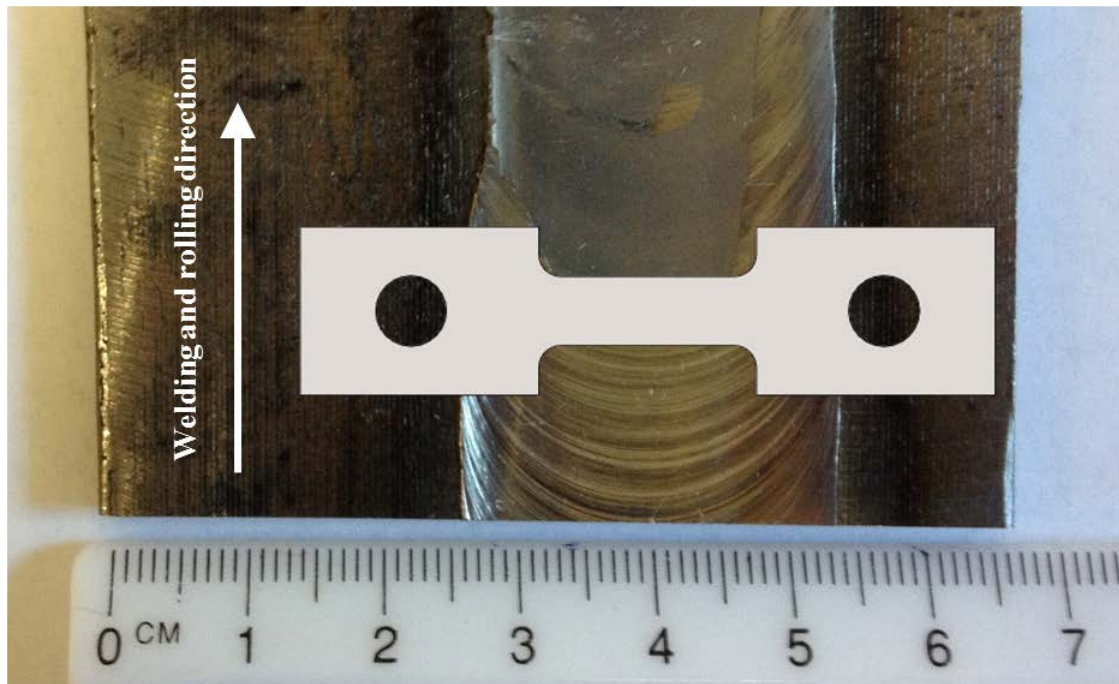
Tensile specimen geometry (gage section measurements: length=12.7 mm, width=5.08 mm, and thickness=1.09 mm) shown with corresponding location with respect to welded MA956 plate.
